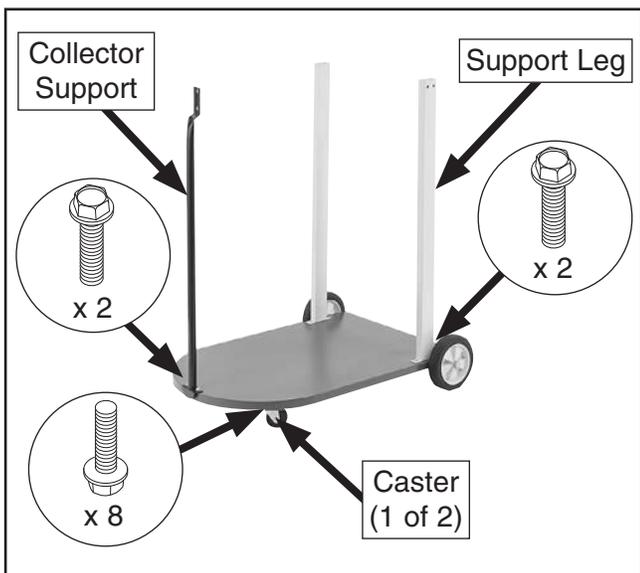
Base assembled with casters, wheels, collector support, and support legs.
